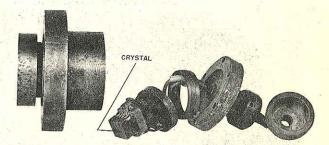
D - Conventional Hydrophone, Exploded View, Showing Construction Details
